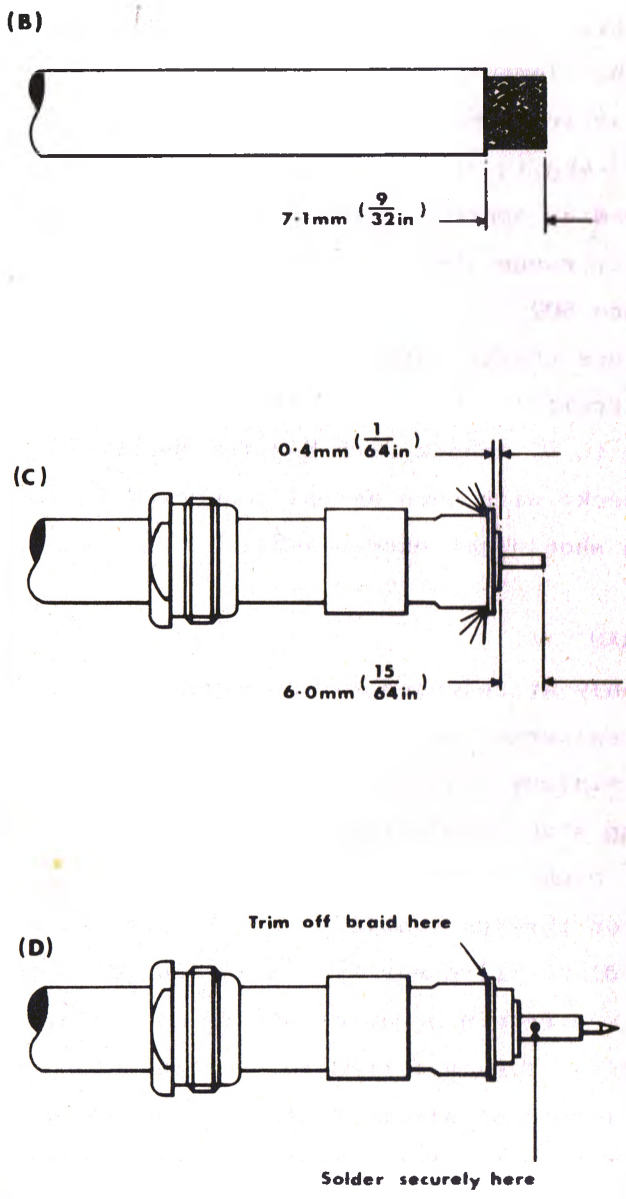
N-Type Coaxial Plug Assembly (GE 15015C)
